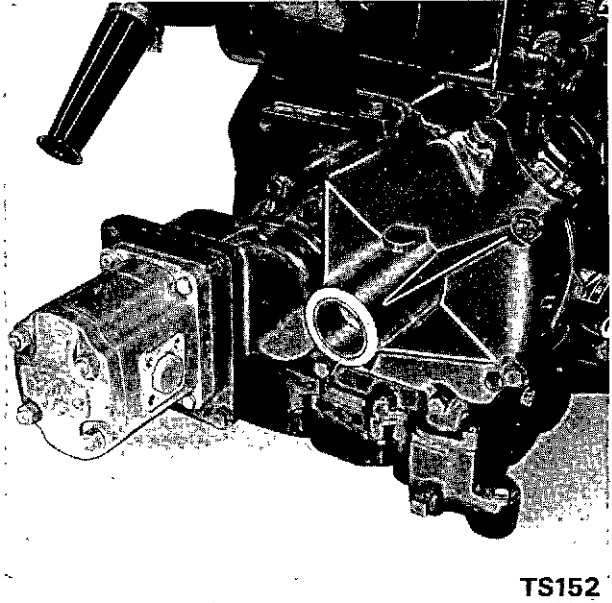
Hydraulic Pump Adaptor – Gear End.
